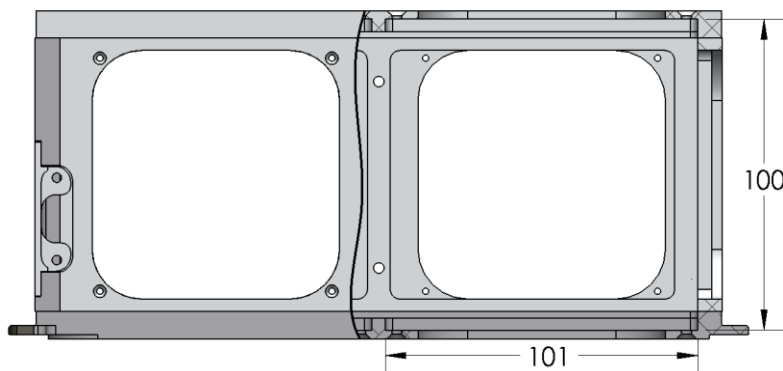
CUTAWAY - CELL CROSS SECTION
